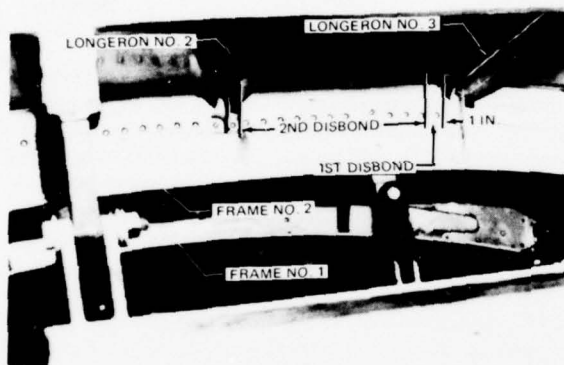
FRAME BENDING TEST FAILURE, DISBOND
